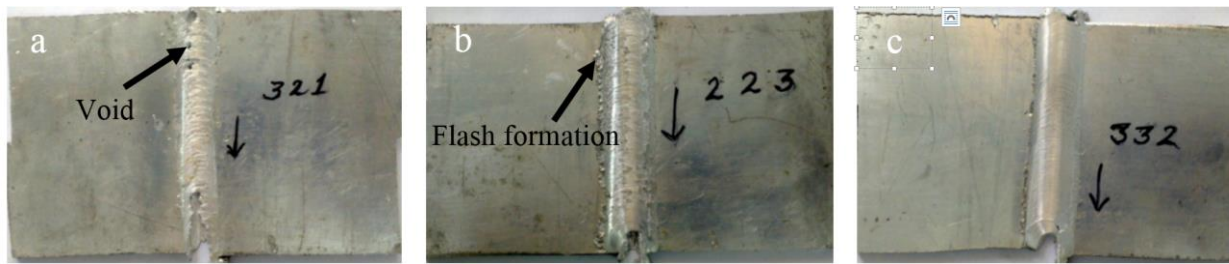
FSW joint with (a) Square pin with tool rotation of 1000 rpm and welding speed of 72 mm/min (b) Triangular pin at tool rotation of 1000 rpm and welding speed of 112.5 mm/min (c) Square pin with tool rotation of 1300 rpm and welding speed of 86 mm/min.
